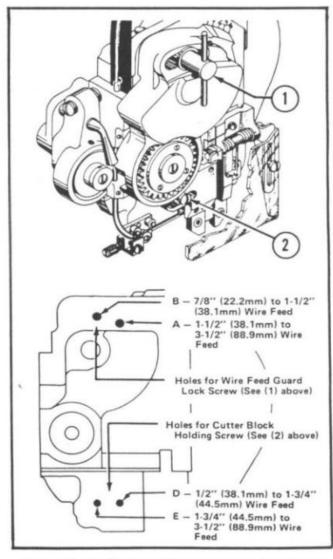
Positioning Wire Feed Lock Screw and Cutter Block Holding Screw
